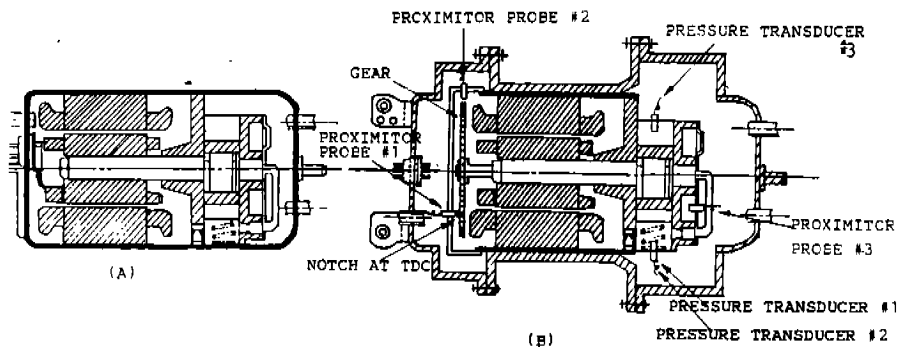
CROSS-SECTION OF REAL COMPRESSOR (A) AND TEST COMPRESSOR. (B)
